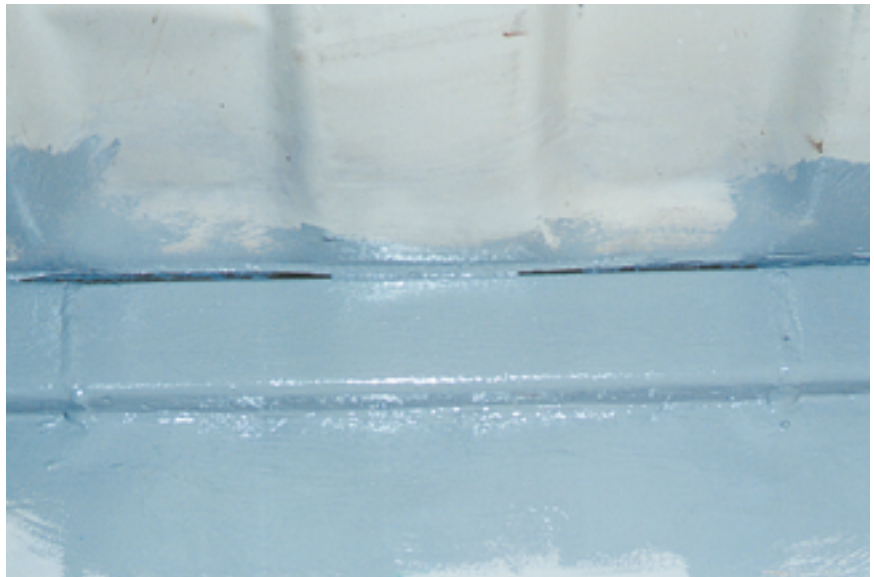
(below) / Priming of tube-type top side rail section and adjacent surfaces on the exterior. See note above for Photo 2.18.
